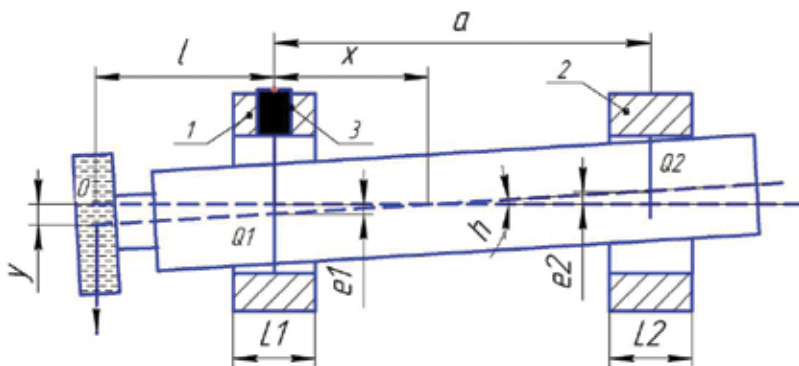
Hybrid gas-magnetic shaft suspension of high-speed spindle: 1—front gas-magnetic bearing; 2—rear gas-static bearing; 3—electromagnet.
